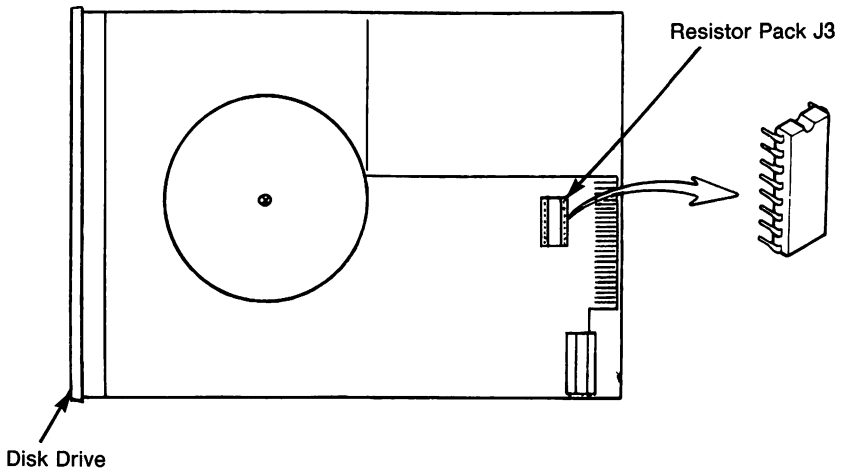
Moving "J3" From Outboard to Inboard Drives
